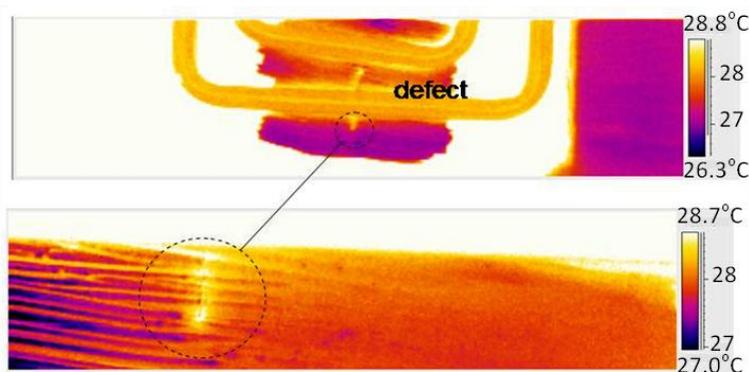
Thermal image showing the crack in the Trueflaw sample obtained by PEC thermography
